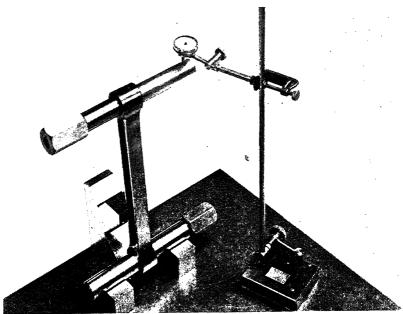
CHECKING ARTICULATED RODS FOR PARALLELISM.
